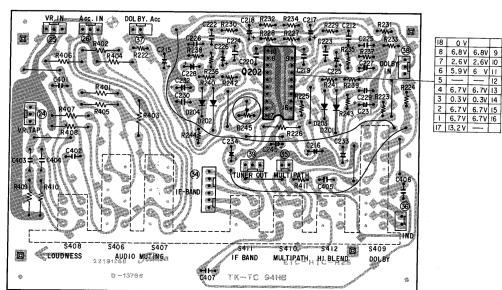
ACCESSORY SWITCH P.C. BOARD (ETC-H25)
